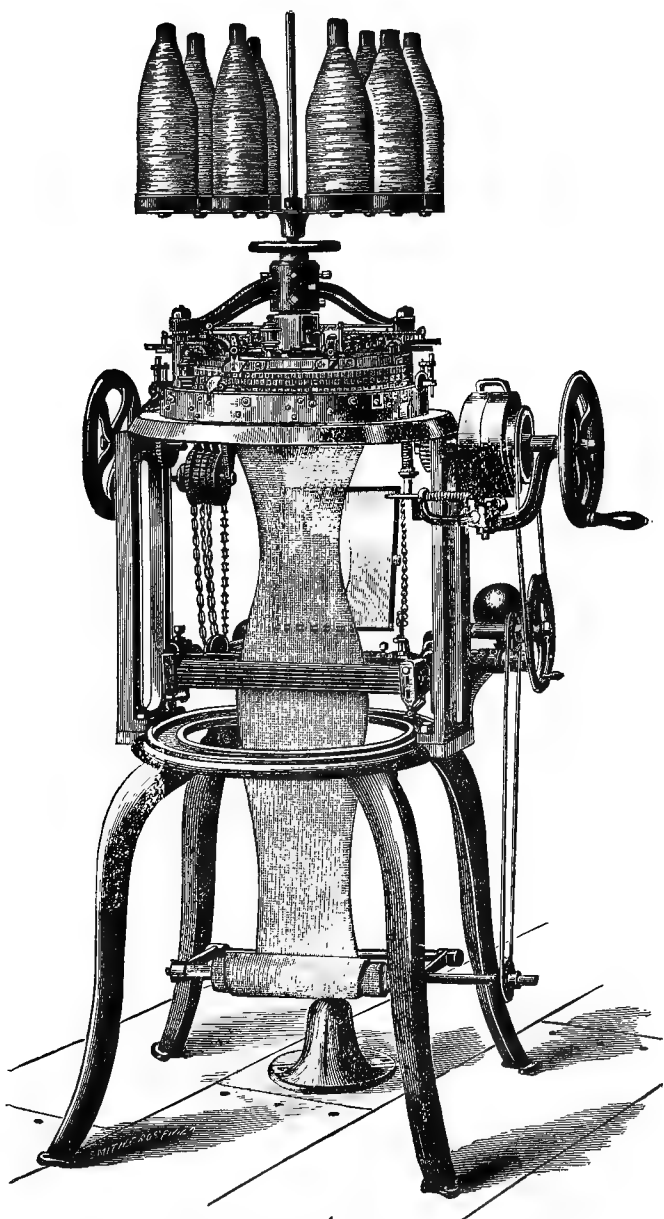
The Heginbotham automatic circular rib-knitting machine.
